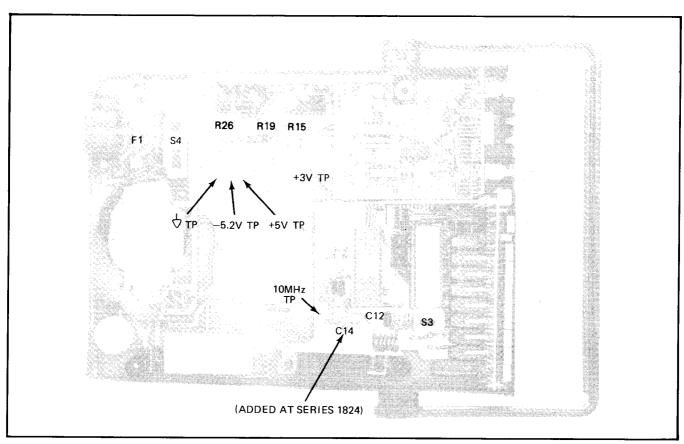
Adjustment Component Locator (A1 Assembly)
